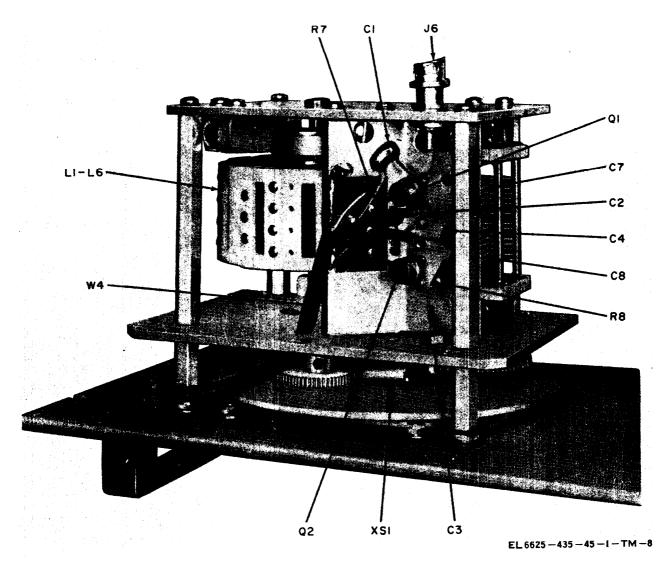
Rf oscillator switch assembly top view with cover removed.
